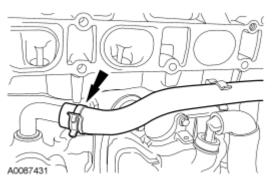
Locating Bypass Hose From Cylinder Block Nipple Courtesy of FORD MOTOR CO.
